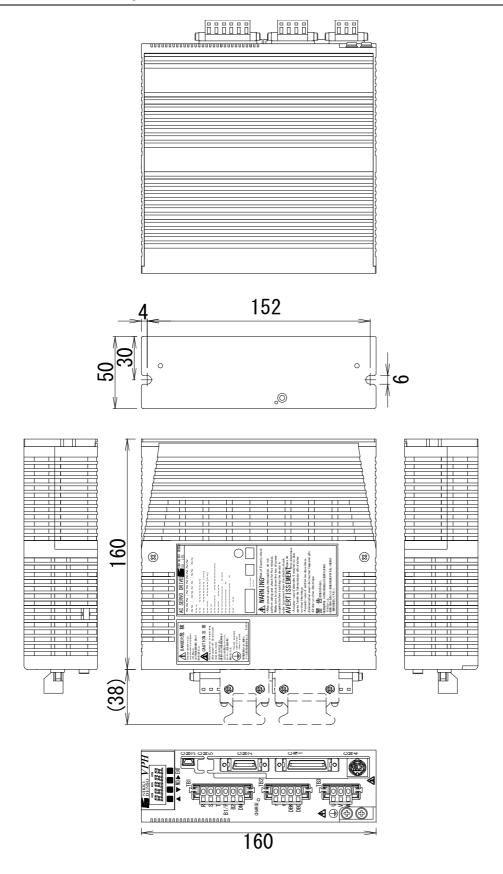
Outline drawing of the main unit of the device with up to 400 W (Type 1)
